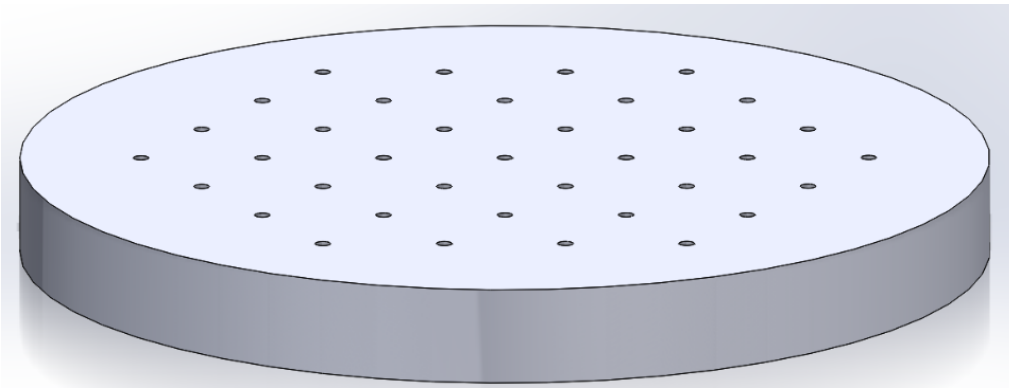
MIMO - Small Cavity AMM Panel - CAD
